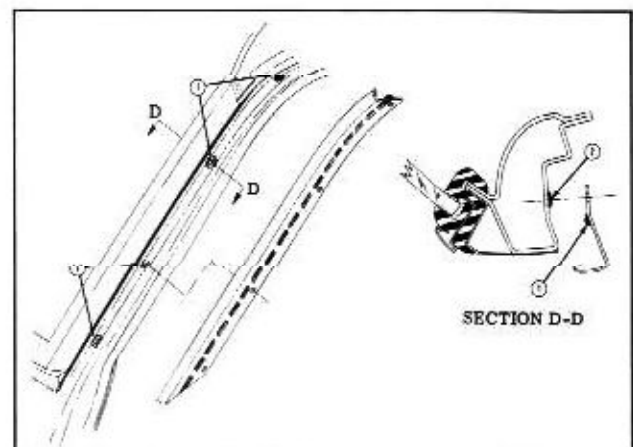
Windshield Pillar Drip Molding Sealing
